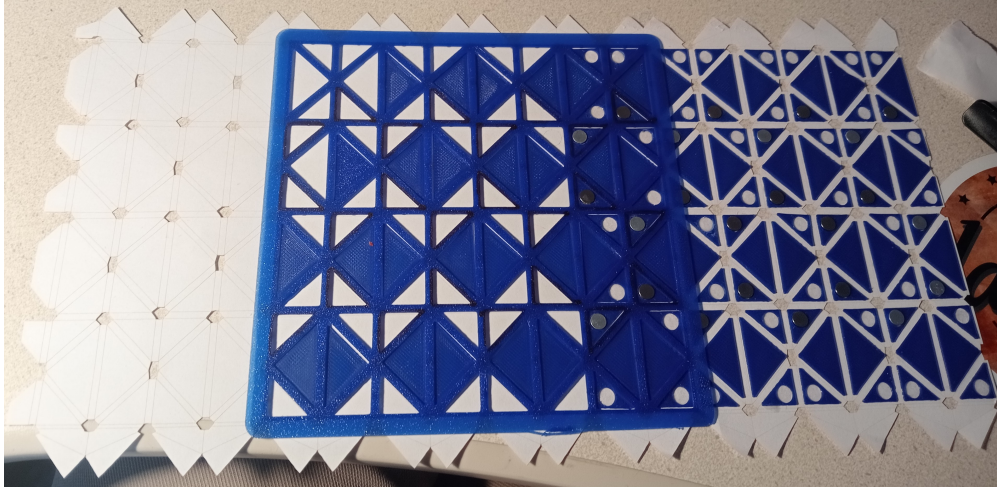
Assembly of an RM prototype, using a stencil to place the panels at the desired location
